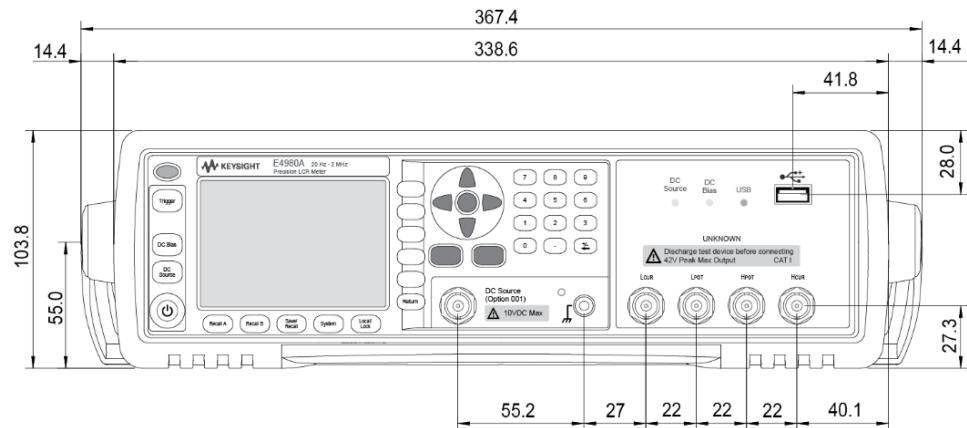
Dimensions (front view, with handle and bumper, in millimeters, nominal)
